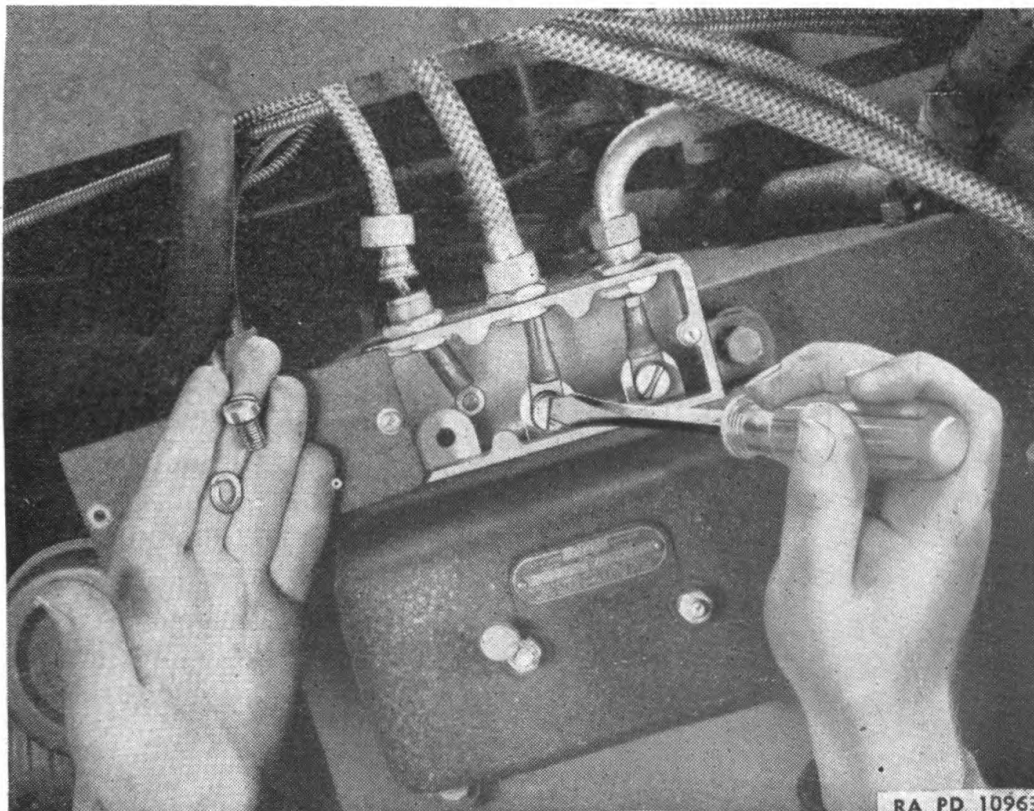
Disconnecting regulator conduit with wire assembly.
